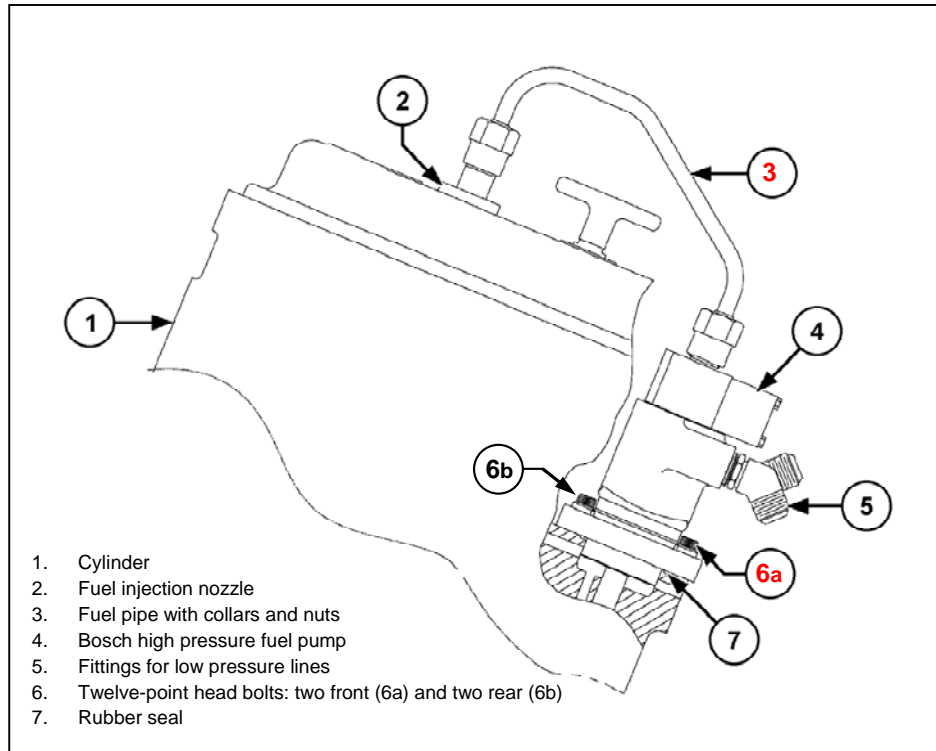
Schematics of the fuel pump-to-cylinder attachment (adapted from GE Parts Catalog PBE-93342-006D). Items 3, 6a and 7 were the failed components.
